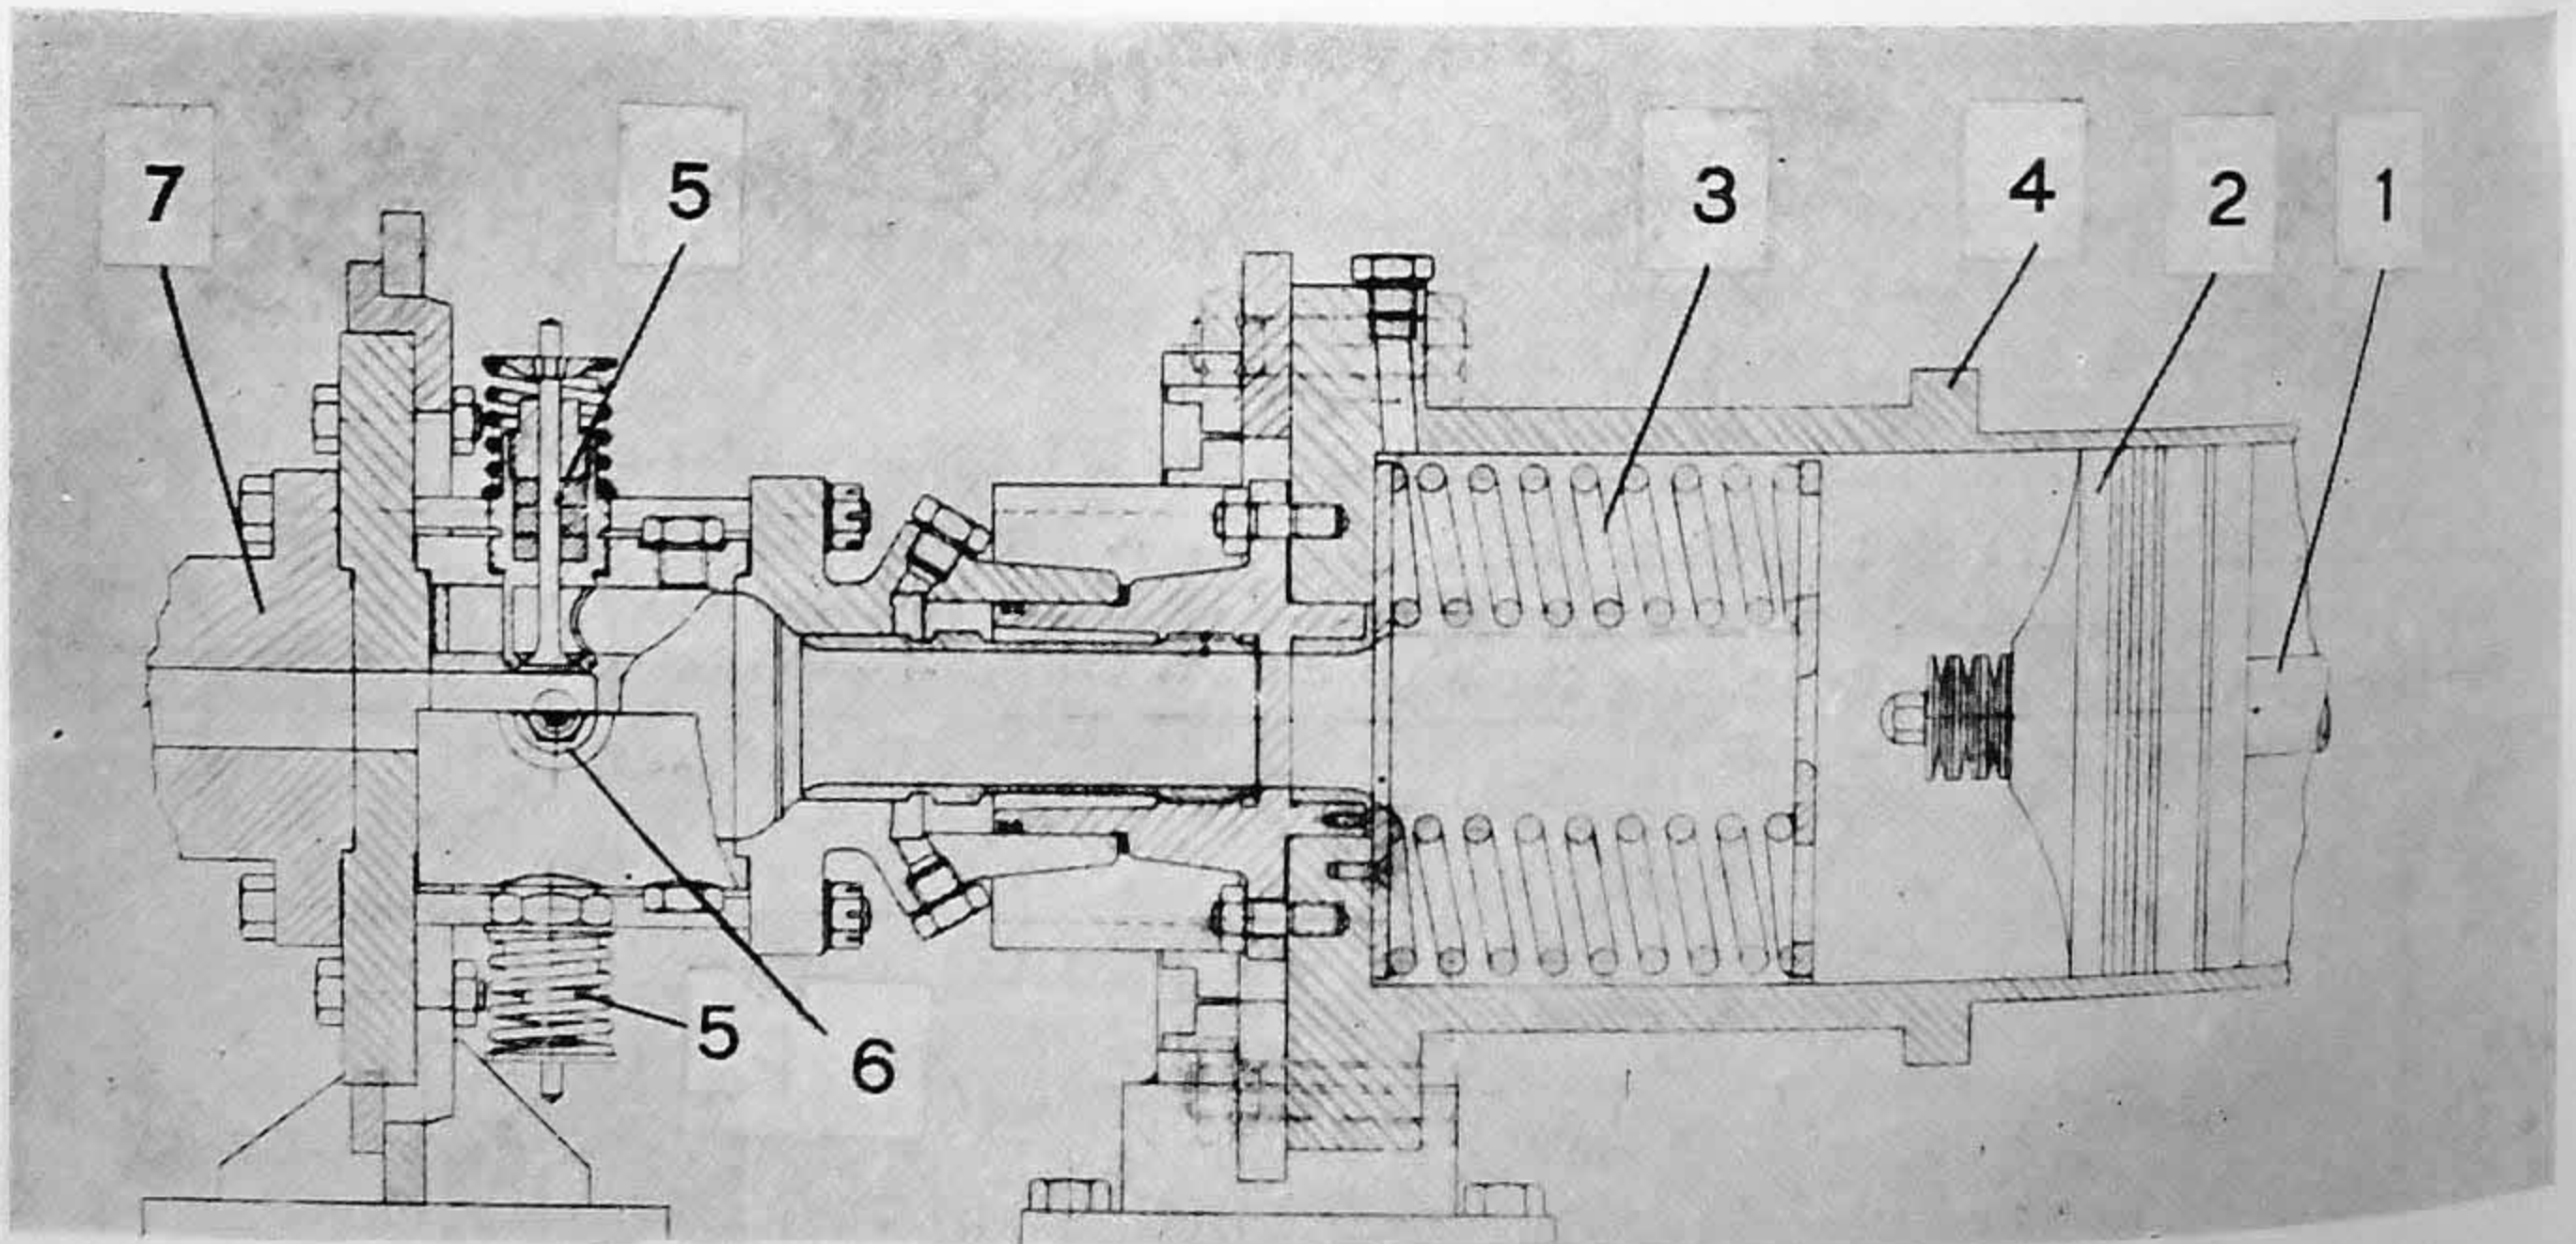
Sectionalised view of medium part of compression apparatus, second version.
